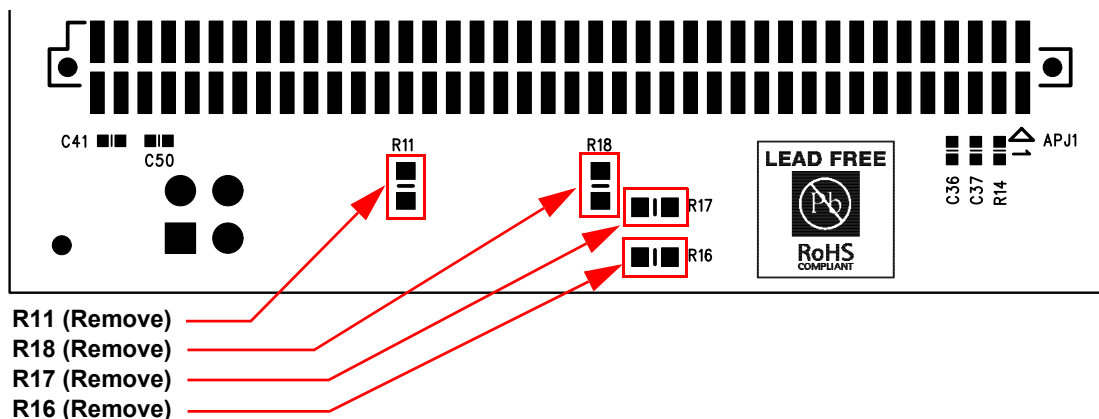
Location – R11, R16, R17, and R18 (bottom side of the PCB)
